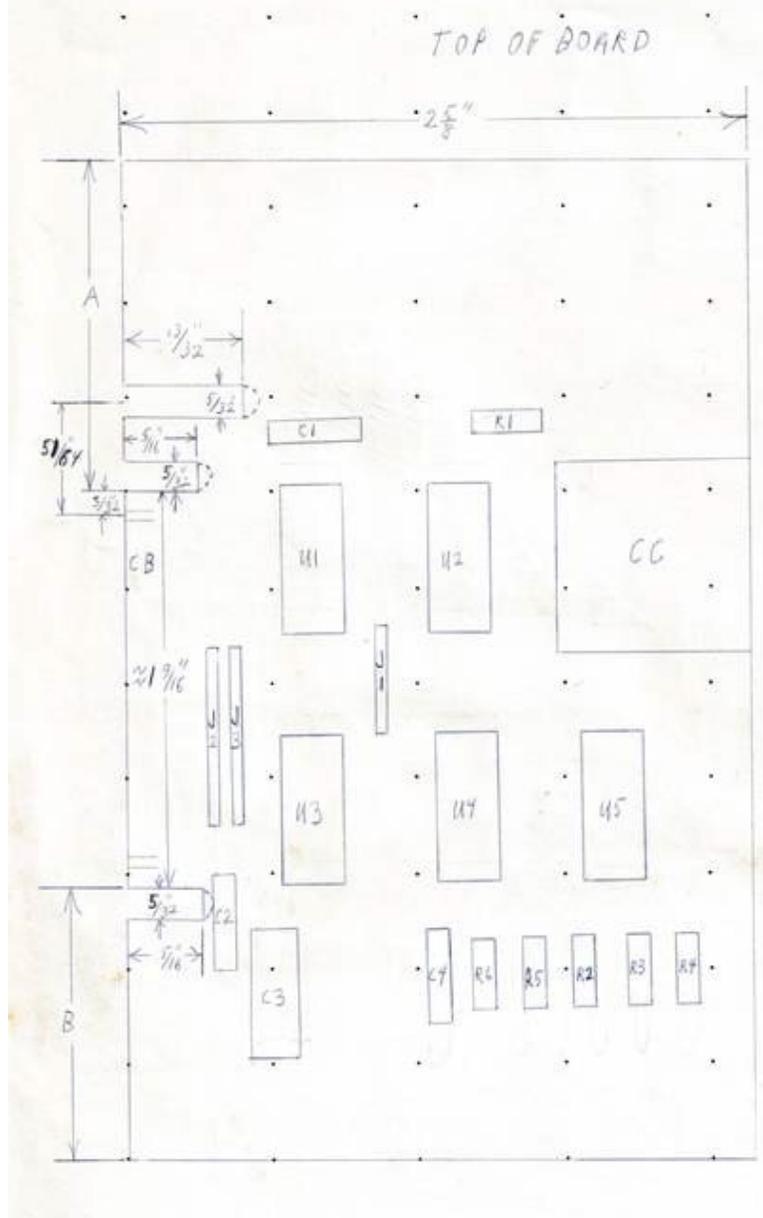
Component Placement / Dimensional Drawing — "Top of Board"
